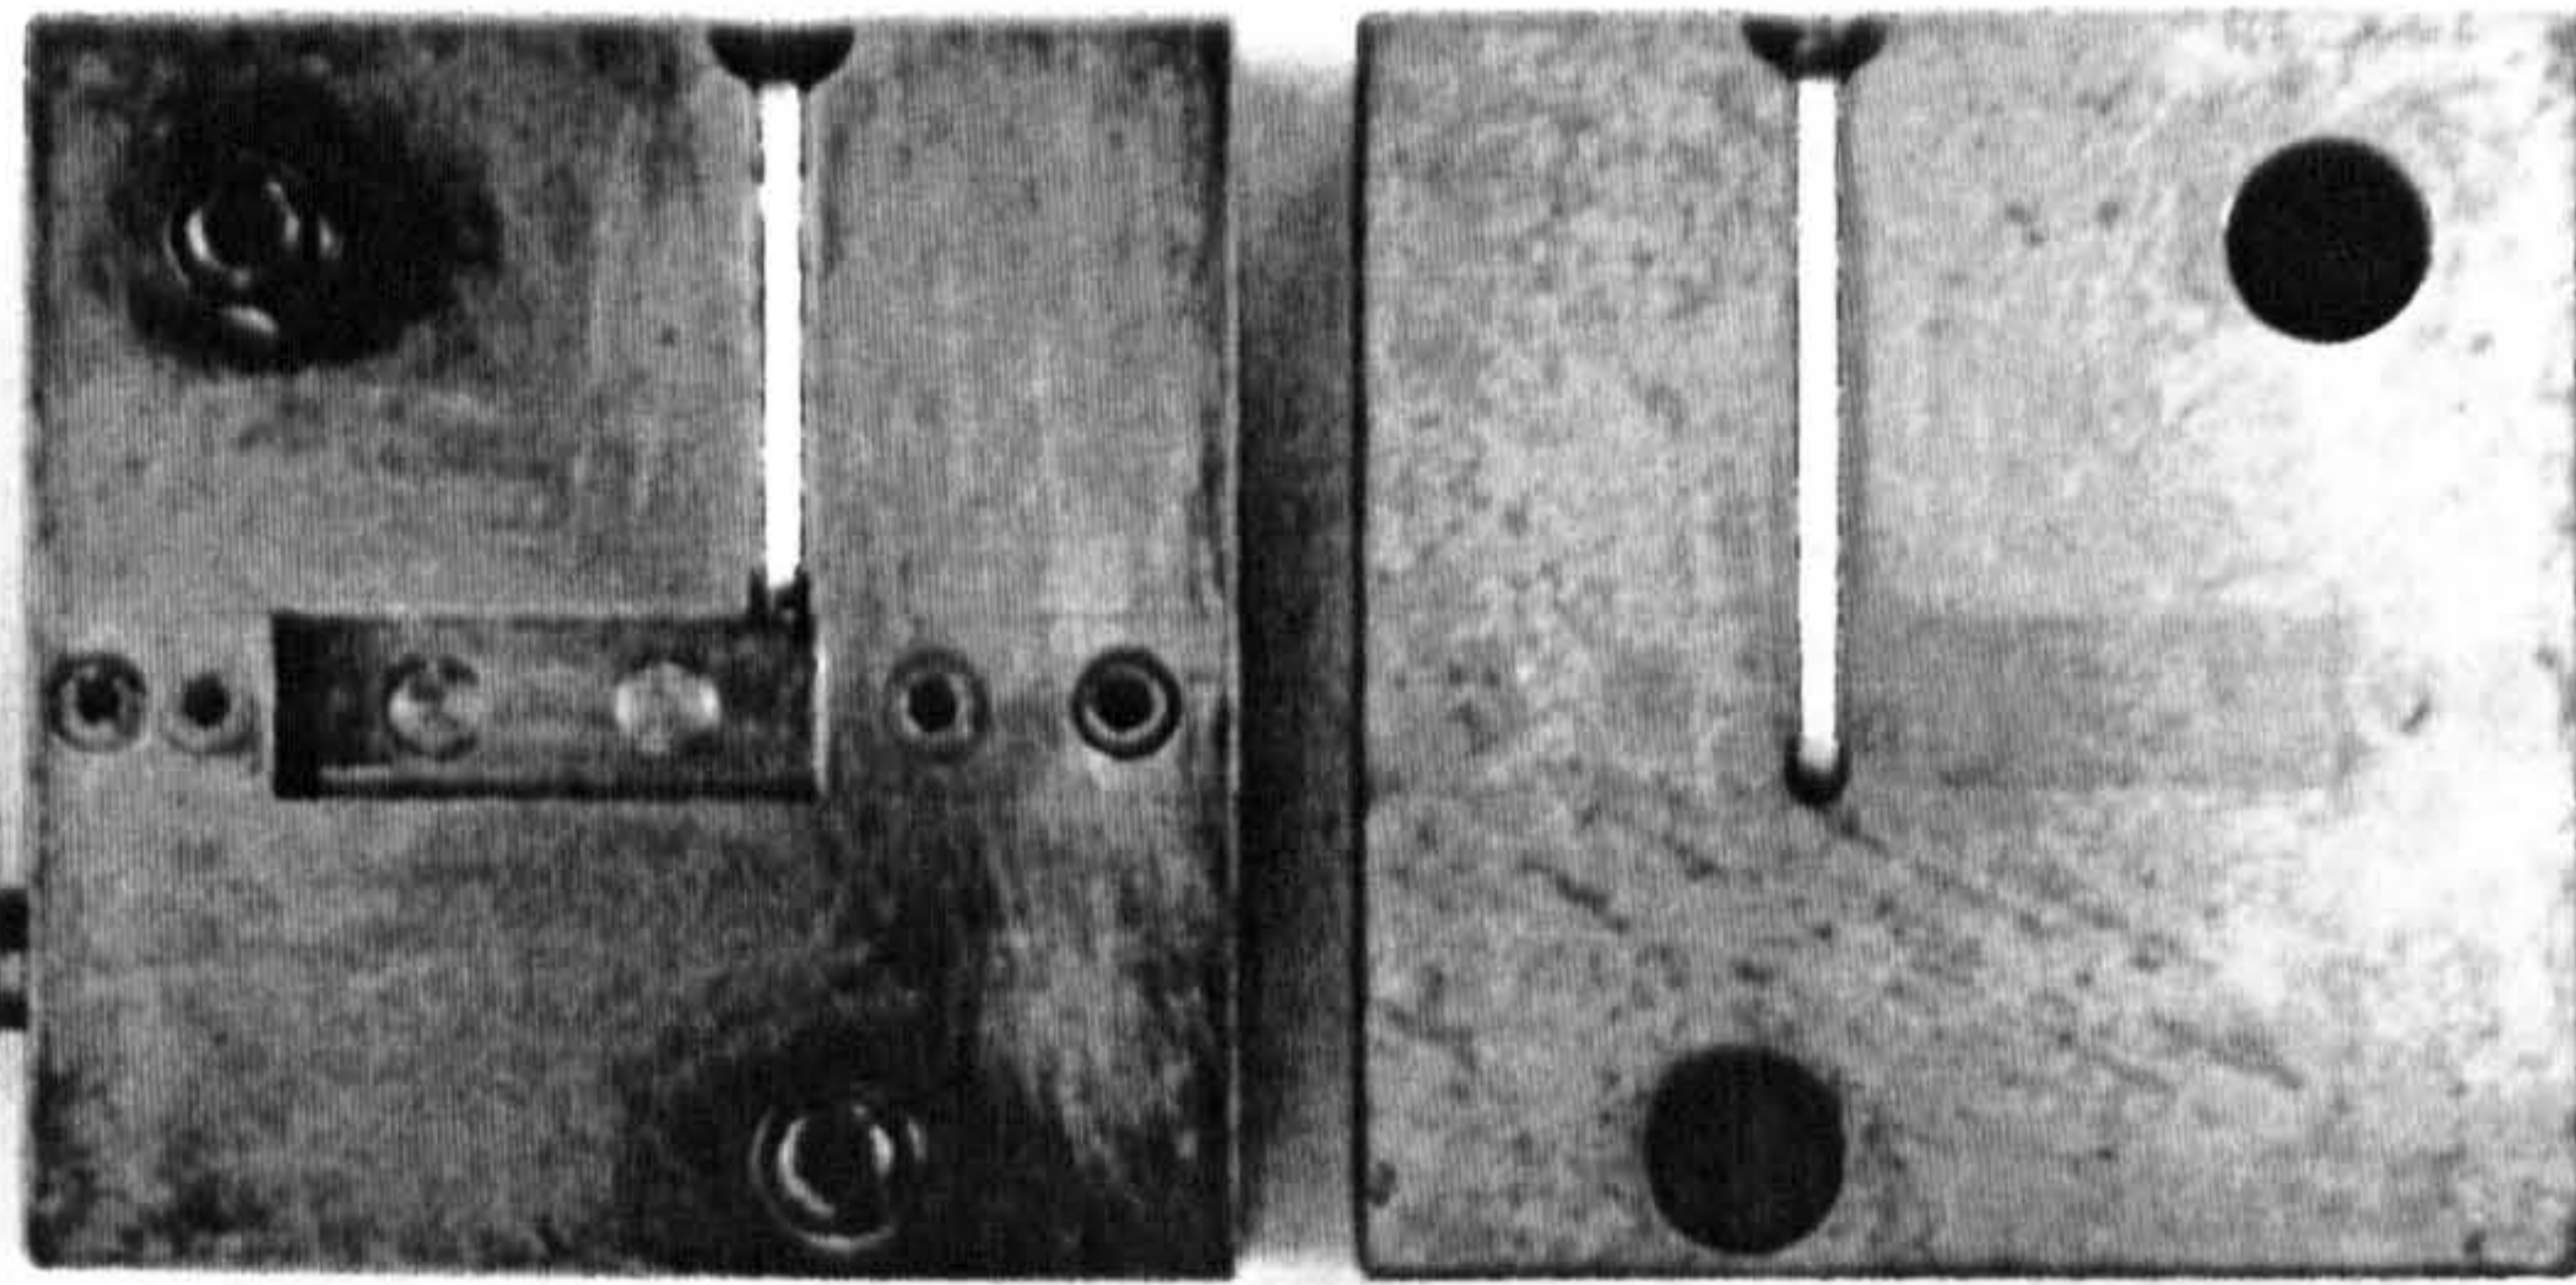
(b) Picture of the mould used for the moulding of the samples in Fig. 3.20- (a).
